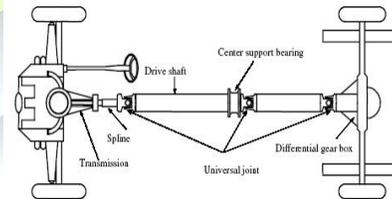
Schematic Diagram of the Drive Shaft for a Rear Wheel Driving Vehicle [2]
